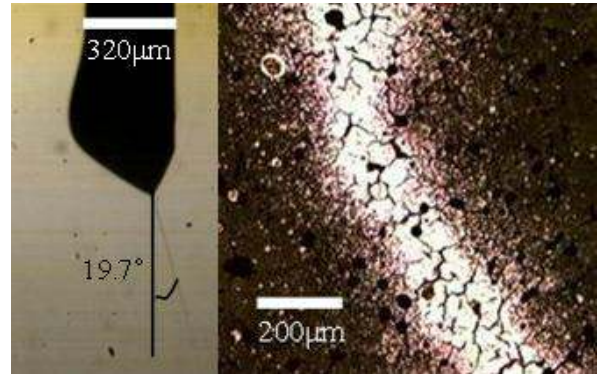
Cone-shape and printed pattern using pin-type nozzle
